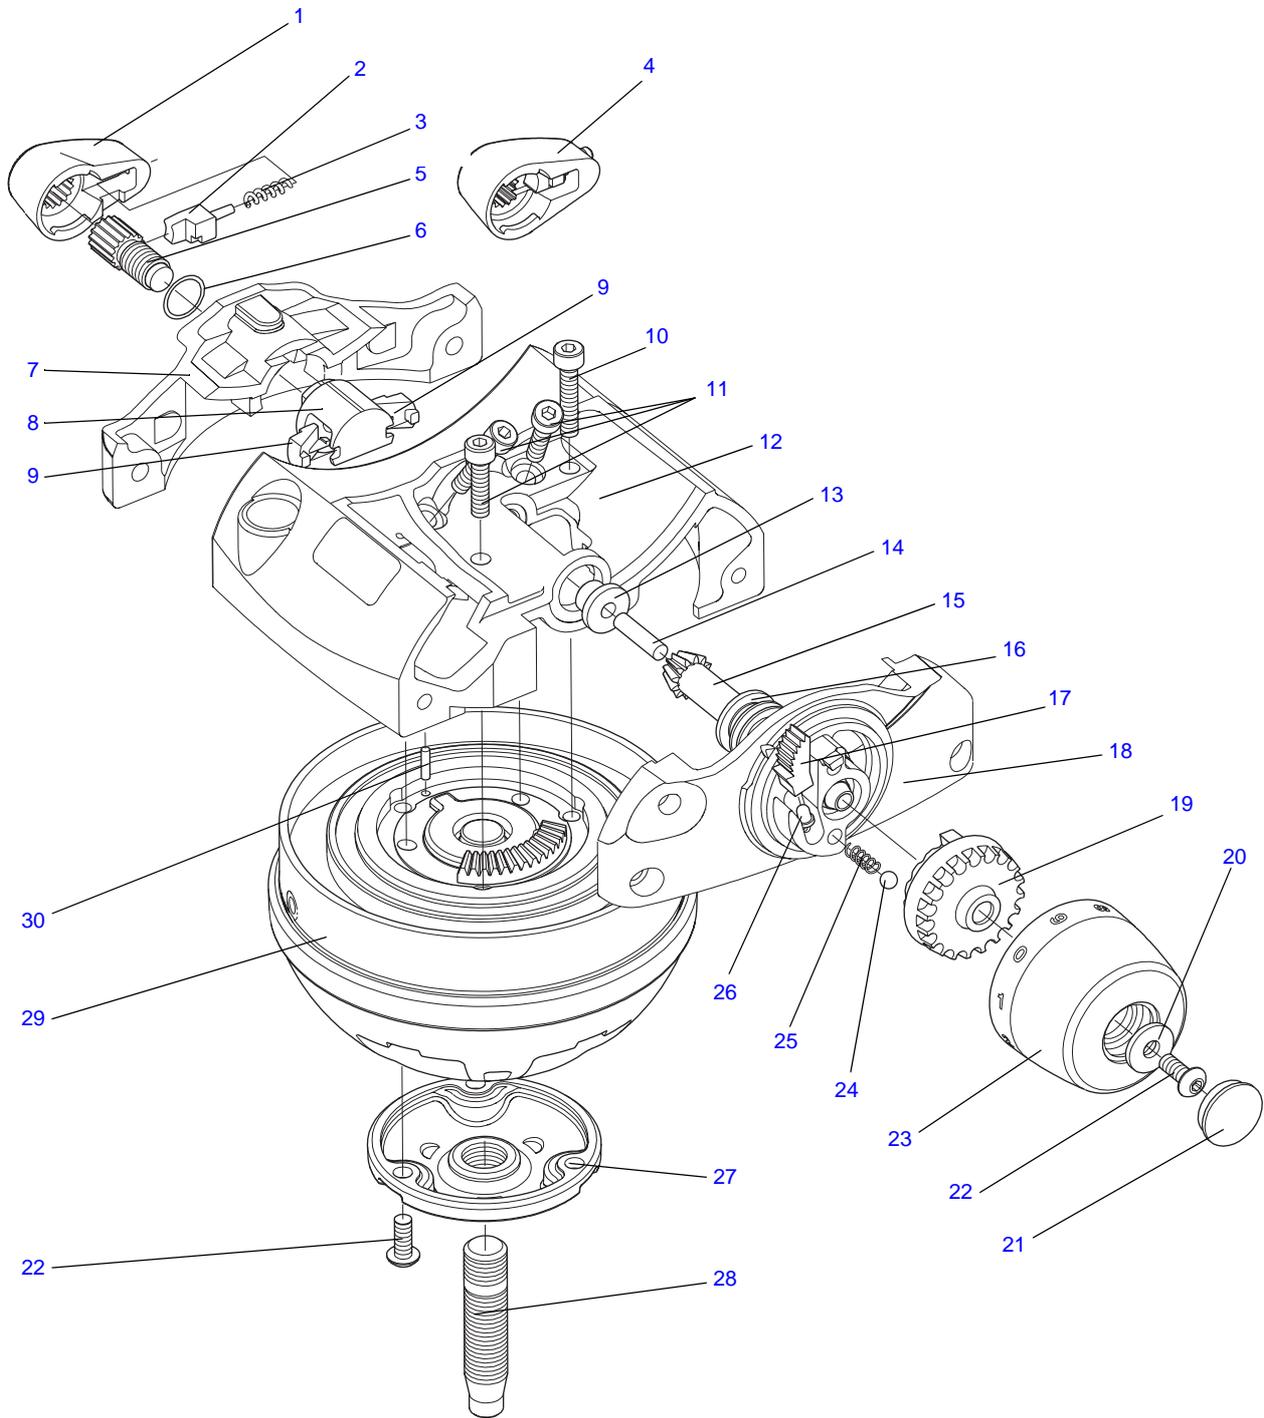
Vision 100 Pan and Tilt Head - Pan Brake and Pan Drag
